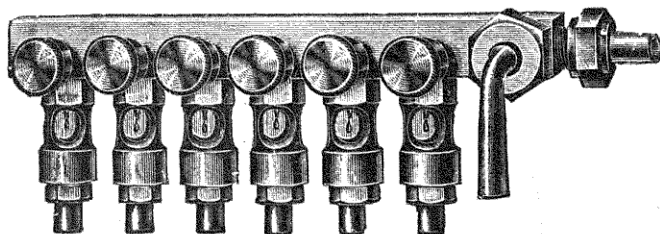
Blanke & Rast oil distributor for pressure lubrication.
